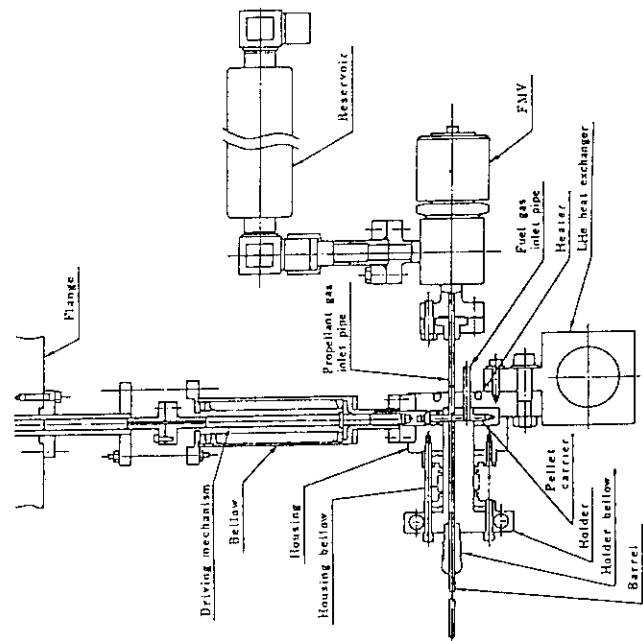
SCHEMATIC DRAWING OF GUN ASSEMBLY
